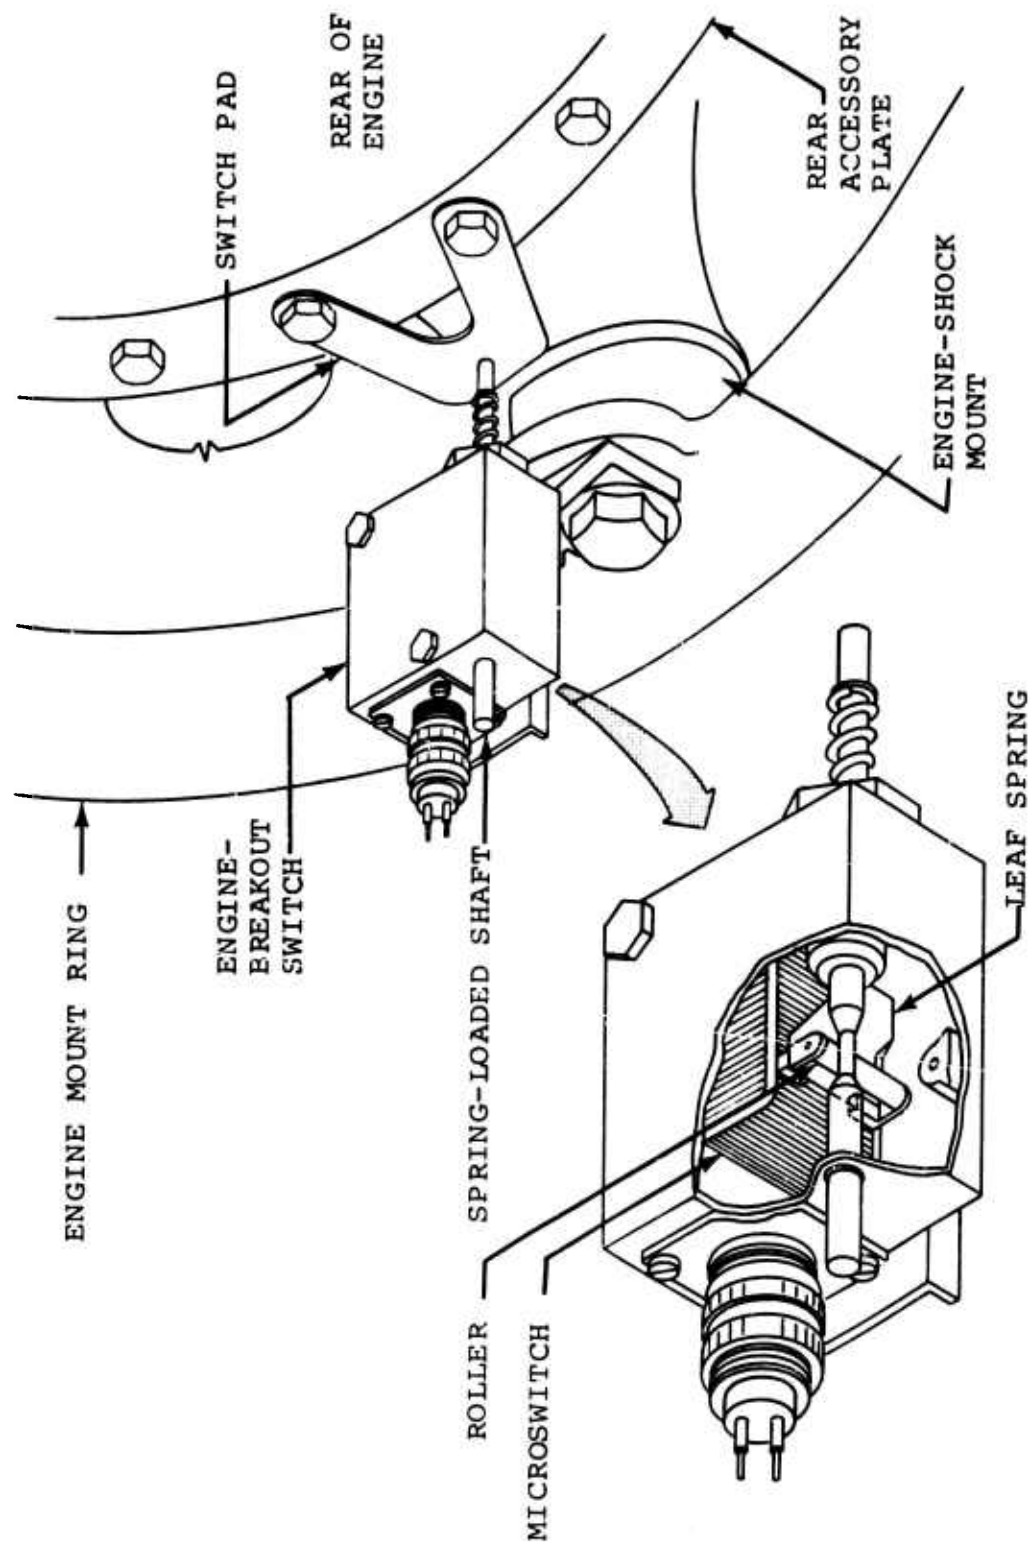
Switch Installed Between Engine Mounting Ring and Engine to Detect Engine Breakout (Reference 3).
